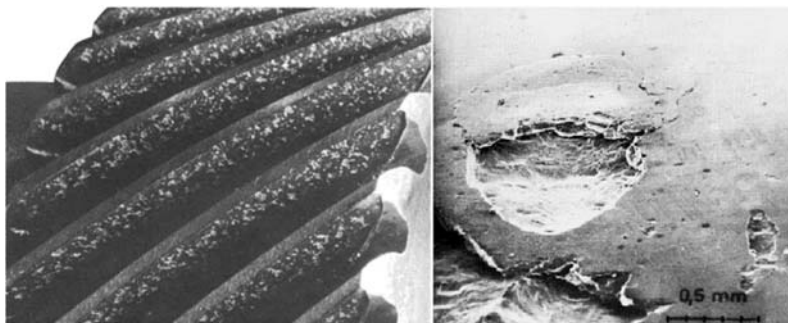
PITTING CORROSION NORMAL & MICROSCOPIC VIEW [17]
